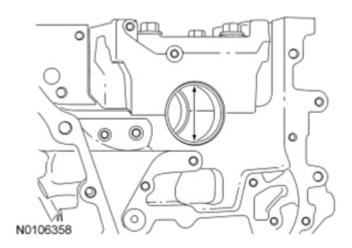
Identifying Crankshaft Block Main Bearing Bore Diameter Courtesy of FORD MOTOR CO.
